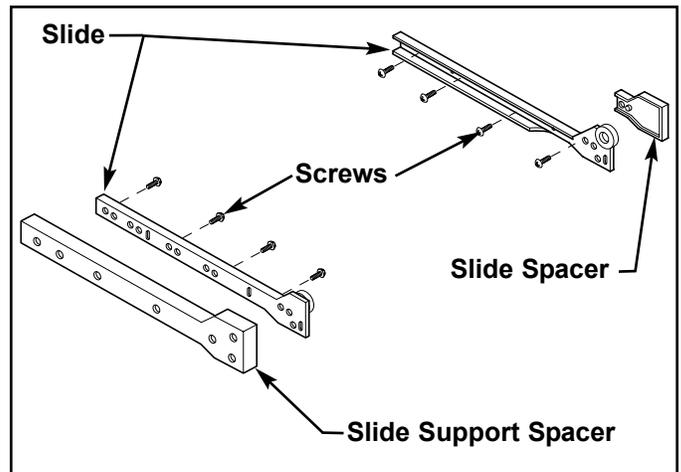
Cabinet Slide, Slide Support Spacer & Slide Spacer Removal
